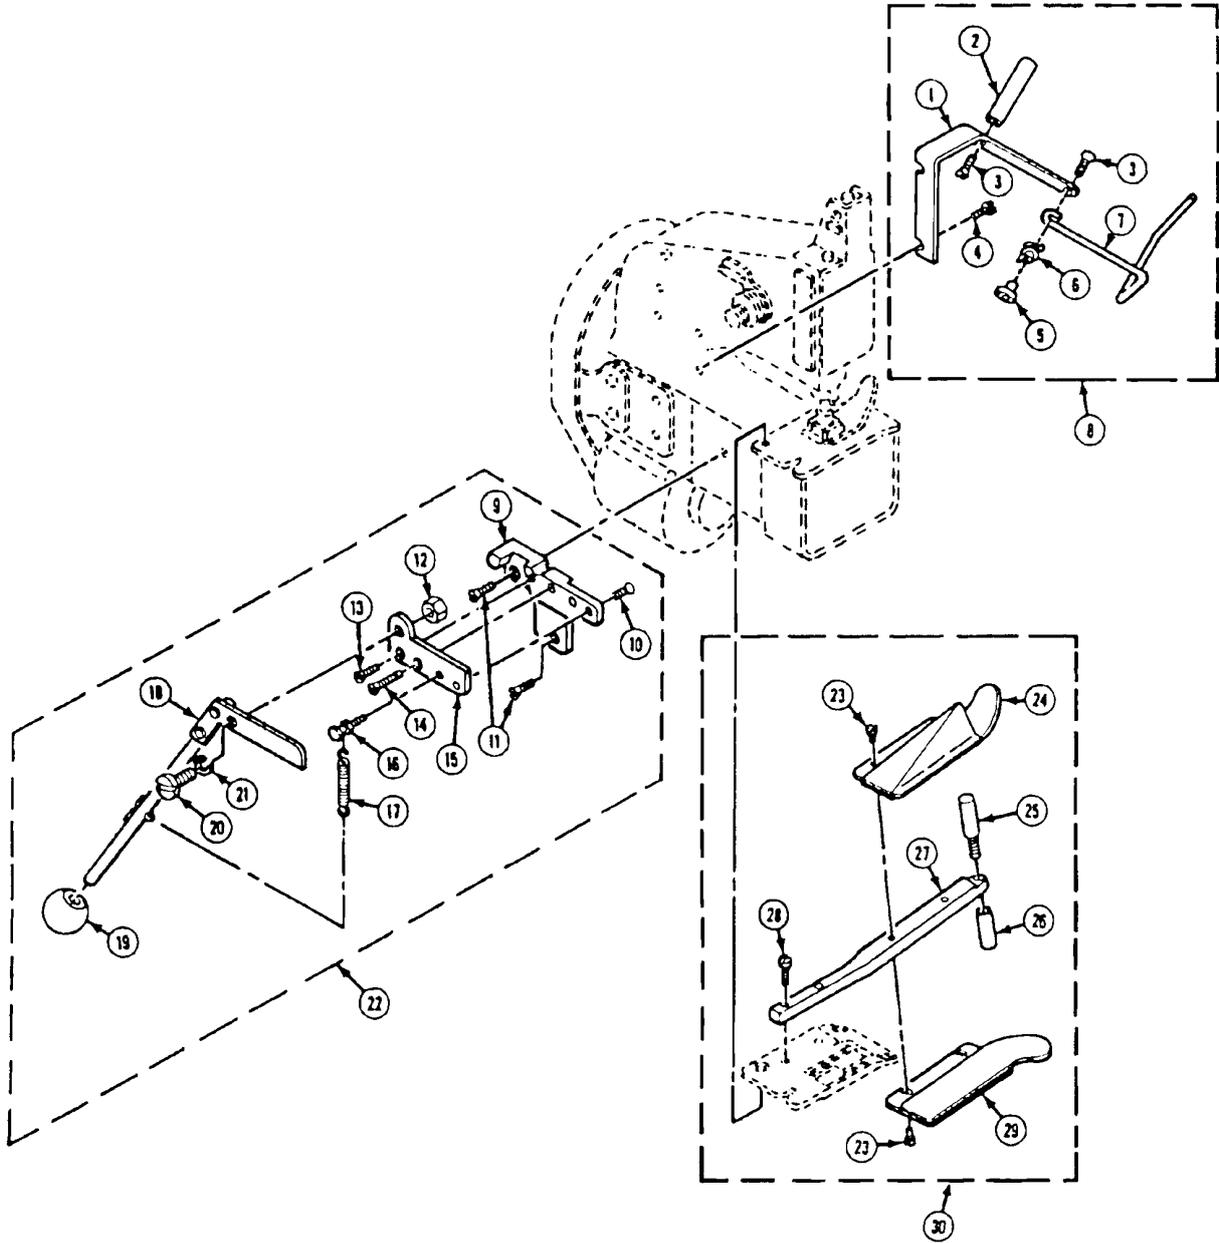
PLATE E: TAPE BINDING ATTACHMENT, 50mm
